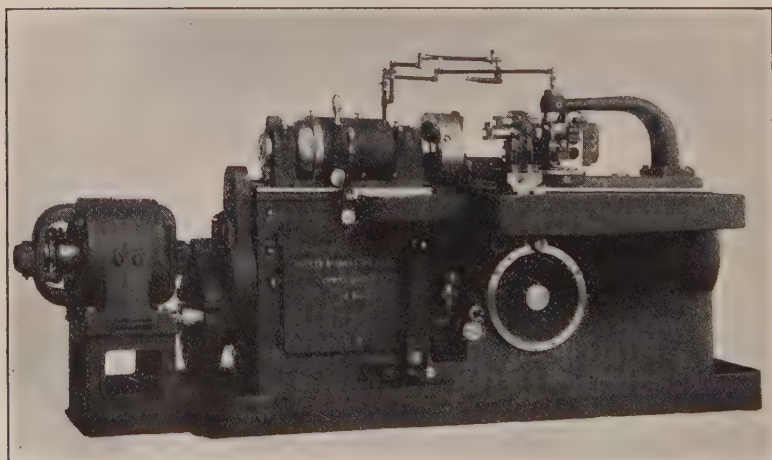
The Potter & Johnston Automatic Turret Lathe for Large Work.
